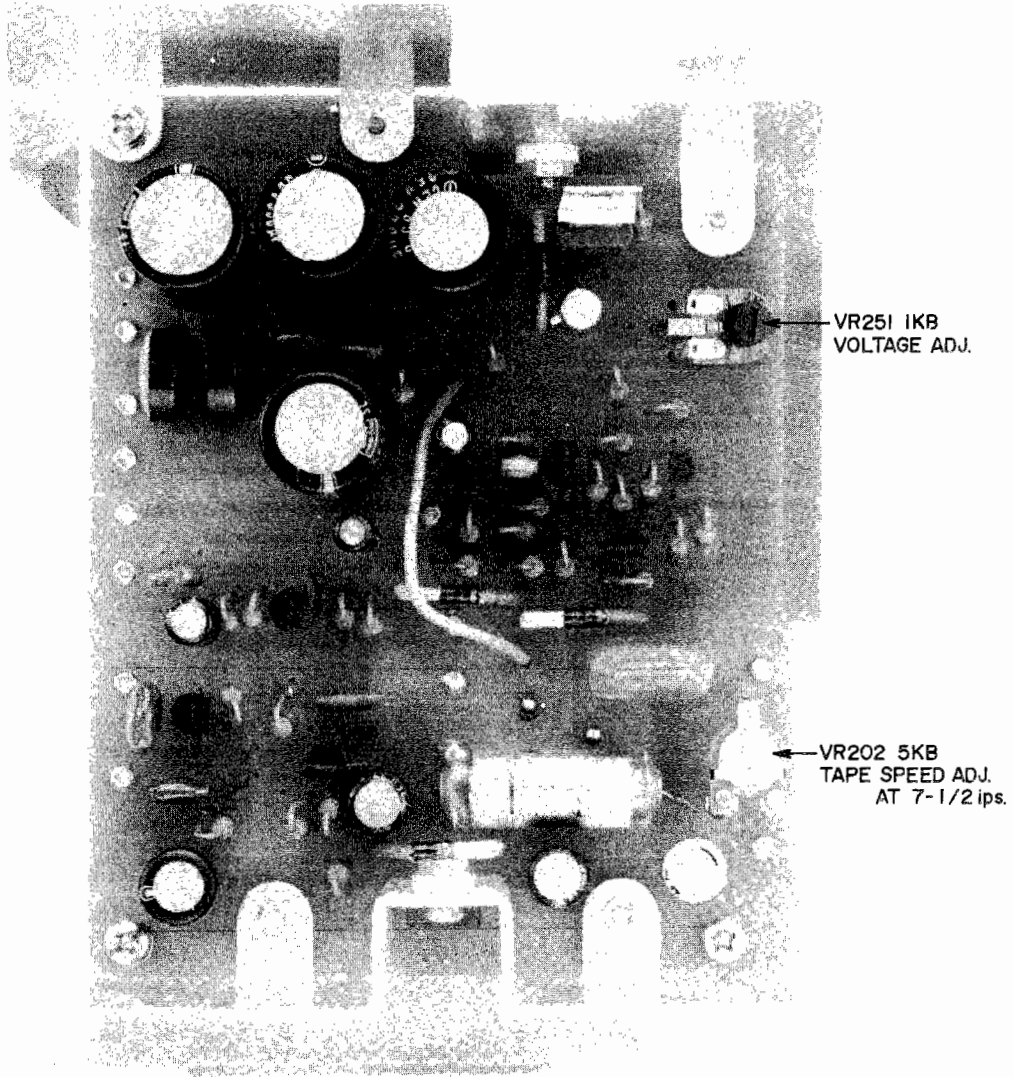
SERVO CONTROL AMP. & POWER SUPPLY P.C. BOARD (FACE SIDE)
